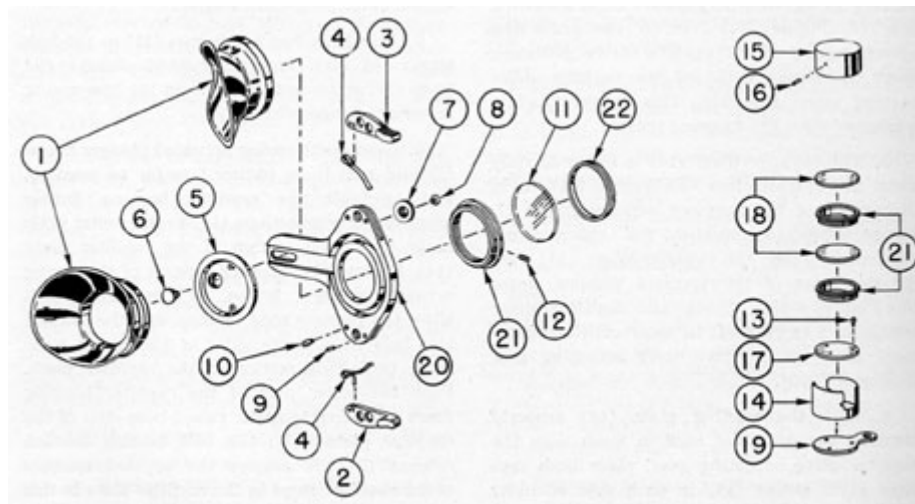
Rayfilter, eye buffer, blinder, and stowage case assemblies.
